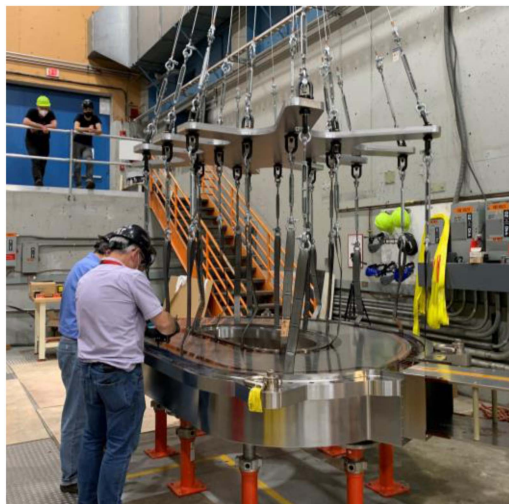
Winding being installed into the structural case using the chandelier-style spreader assembly.
